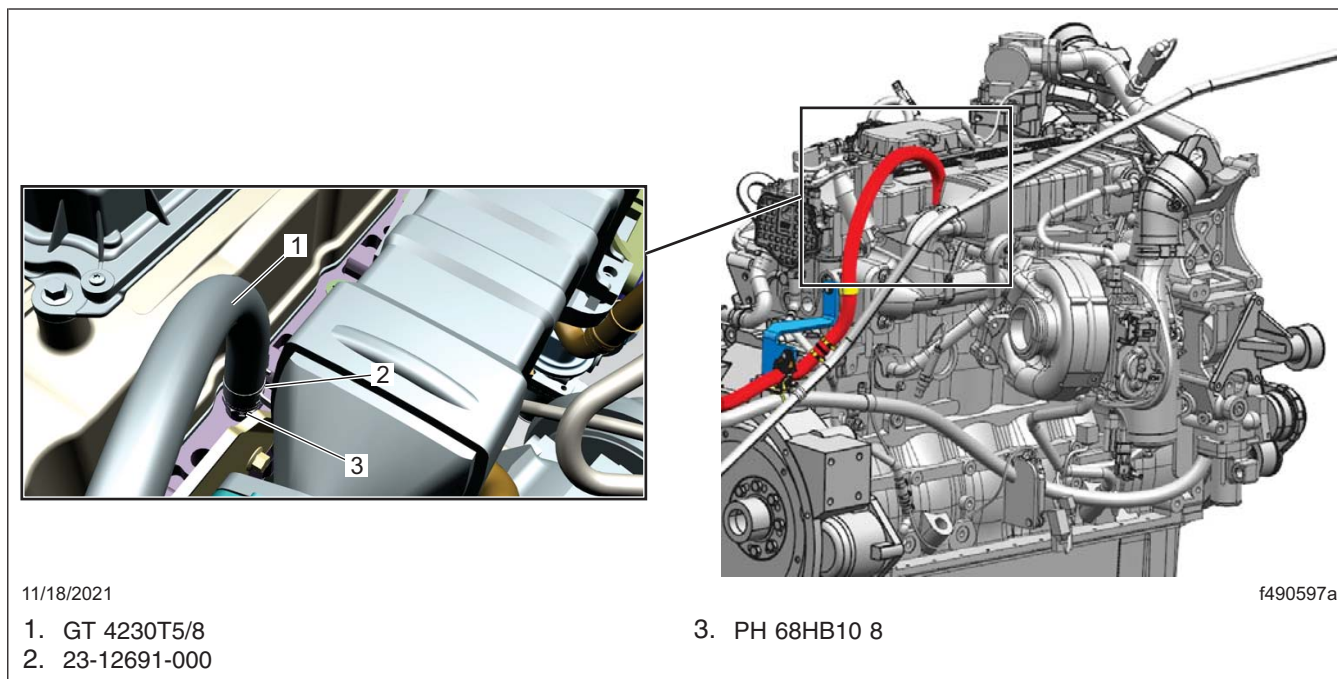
, New DEF Coolant Supply Soft Line Engine Fitting
